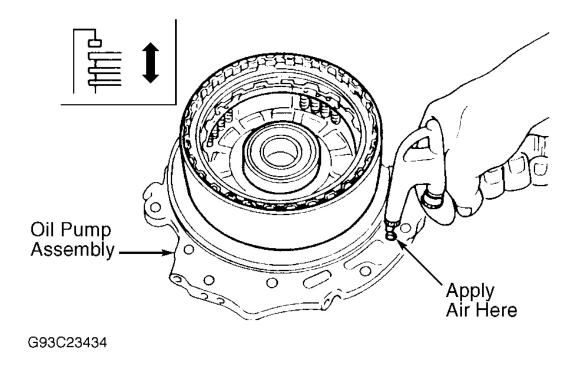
Checking Reverse Clutch Operation Courtesy of NISSAN MOTOR CO., U.S.A.
